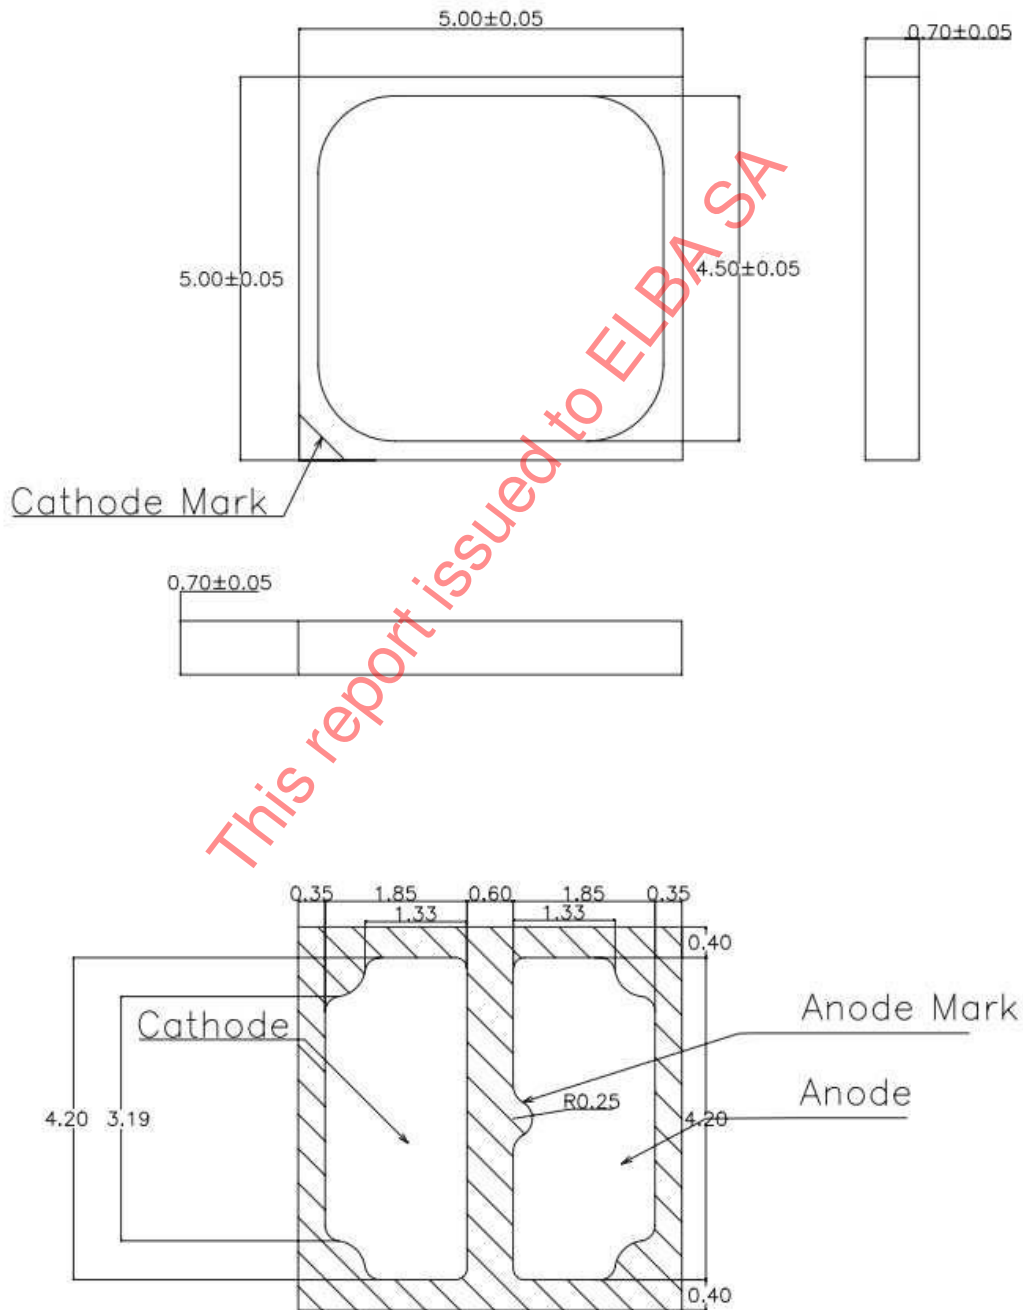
Mechanical drawings for LUXEON 5050 (Square LES)
